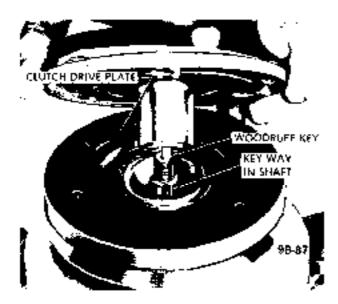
B-113 Positioning Clutch Drive Plate on Shaft
